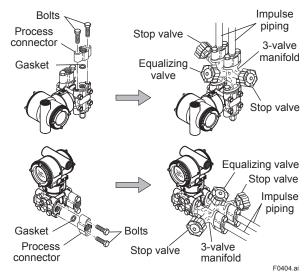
3-Valve Manifold (Direct-Mounting Type)
